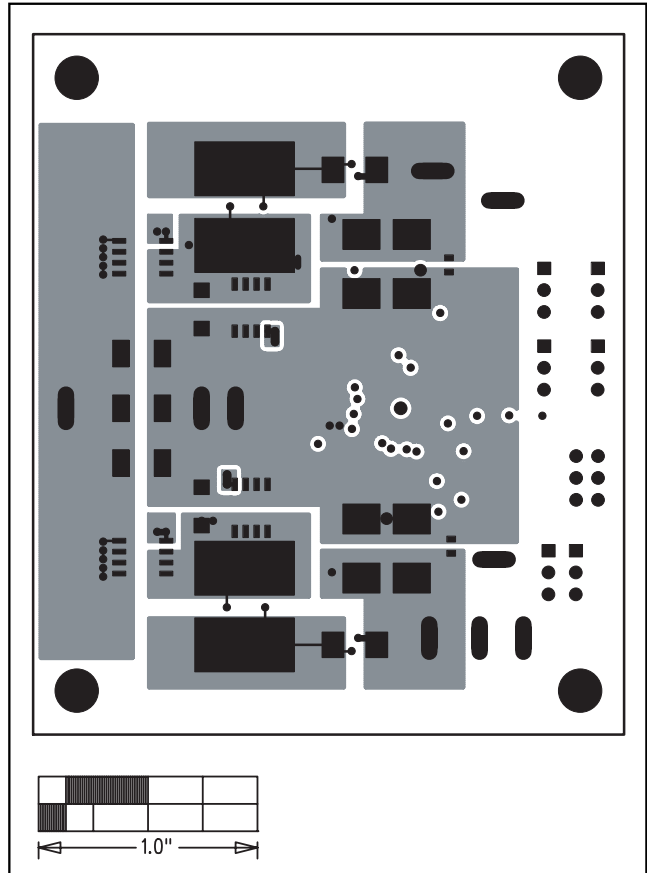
MAX1533 EV Kit PC Board Layout—Component Side
